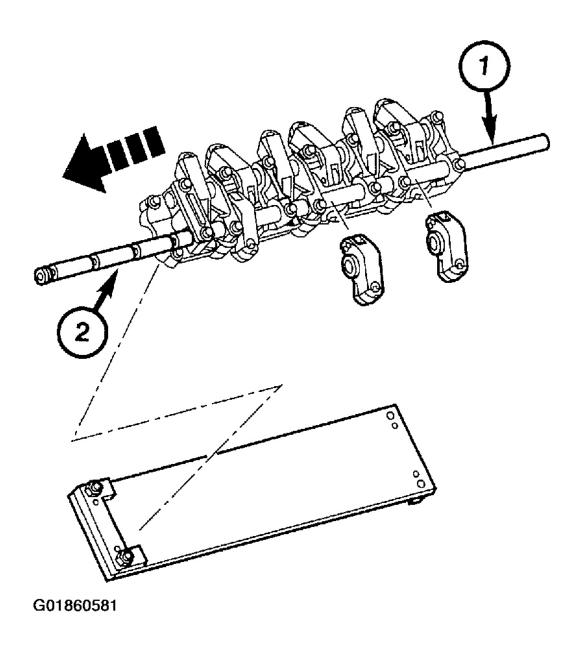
Using Drift To Drive Out Rocker Shaft Courtesy of DAIMLERCHRYSLER CORP.
